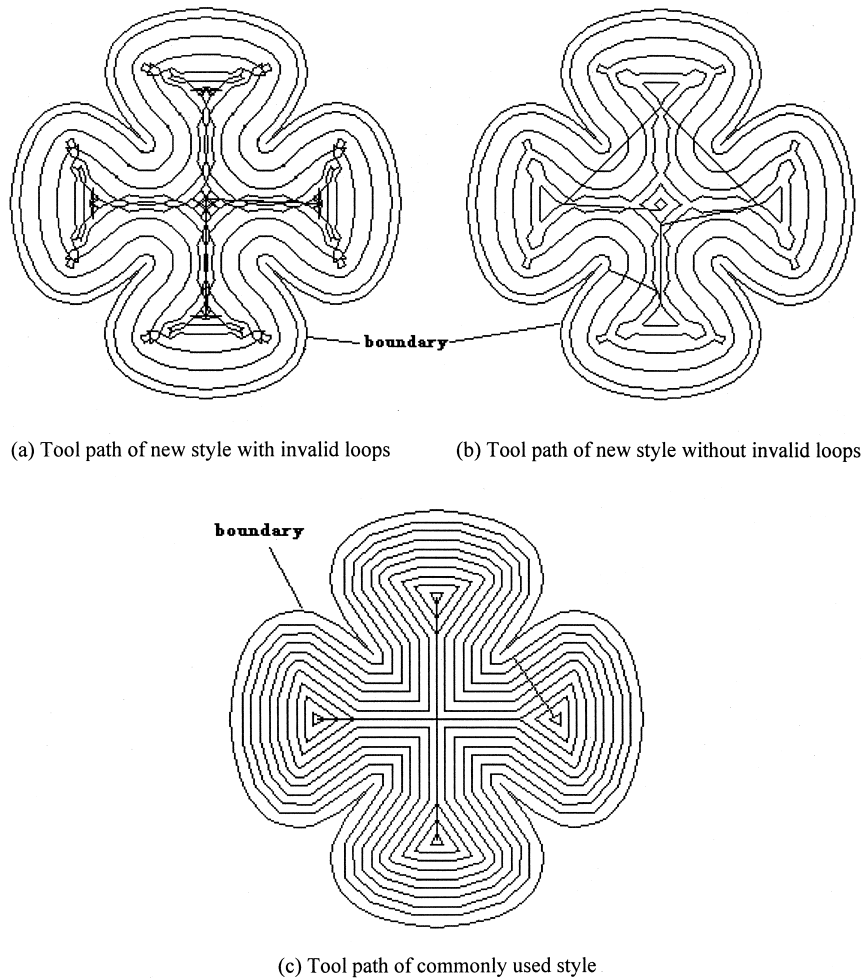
Example of tool path generation for a badge-shaped pocket machining.
